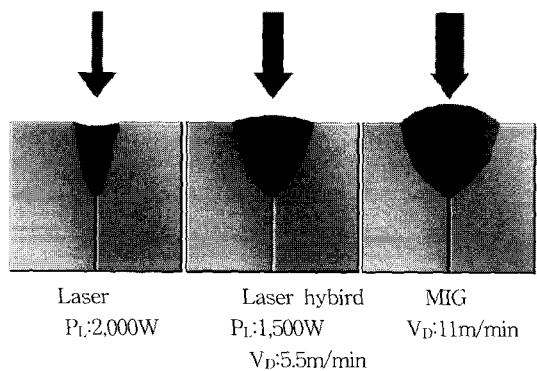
Comparison between the seam geometry of laser, MIG and Laser hybrid welding seams with the same penetration depth and the same welding speed
